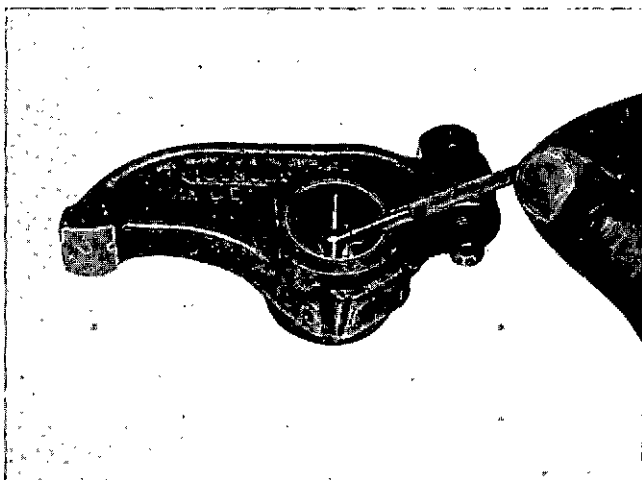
, V40306. Check rocker lever bushing for wear
